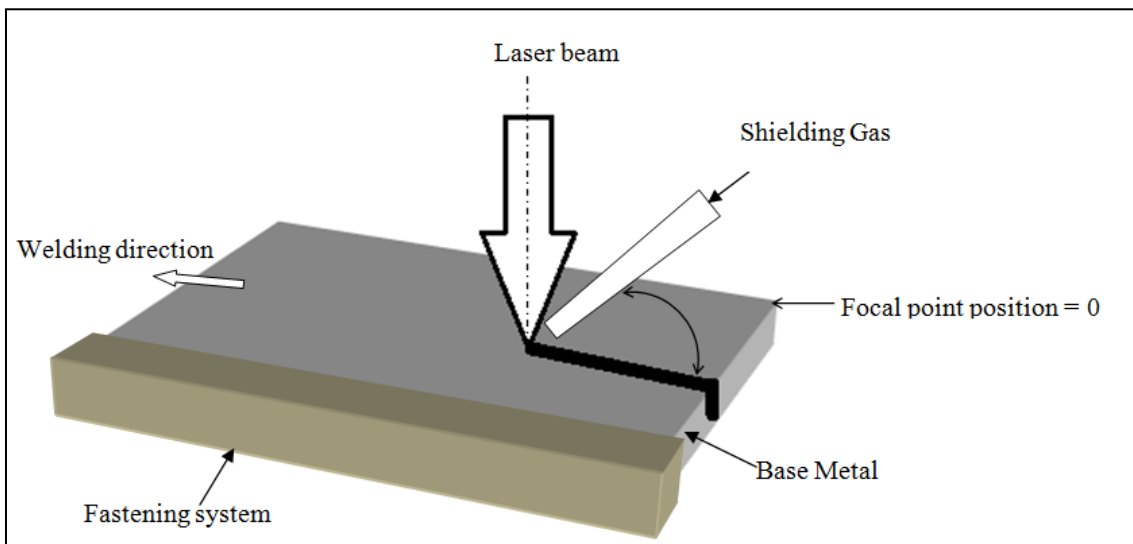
Typical set up of a laser welding process [61, 67]
